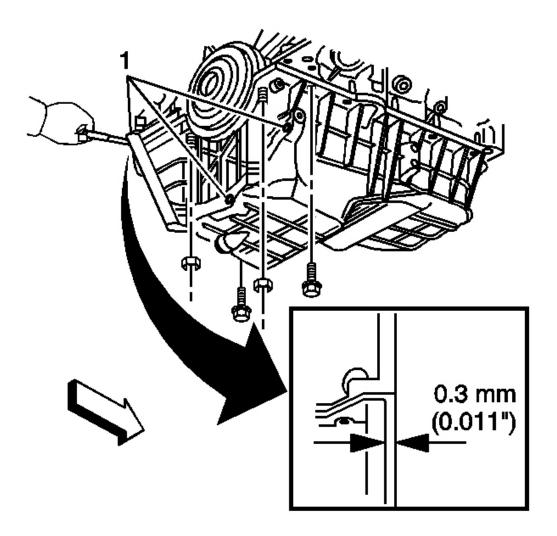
Measuring Oil Pan-To-Transmission Housing Clearance Courtesy of GENERAL MOTORS CORP.
